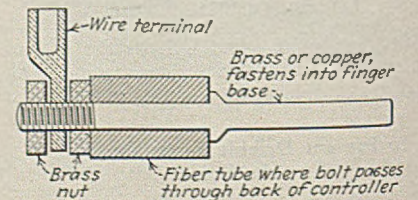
Bolts Used to Fasten the Wires to the Finger Base in the Controller
